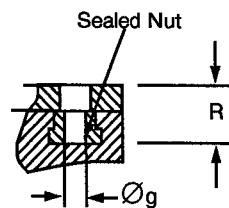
PHYSICAL DIMENSIONS (CONTINUED)
